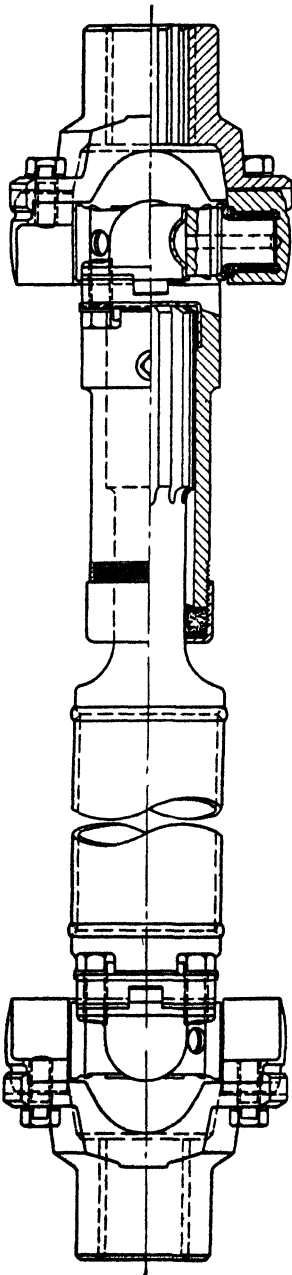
PROPELLER-SHAFT AND UNIVERSAL-JOINT ASSEMBLY (MECHANICS).
